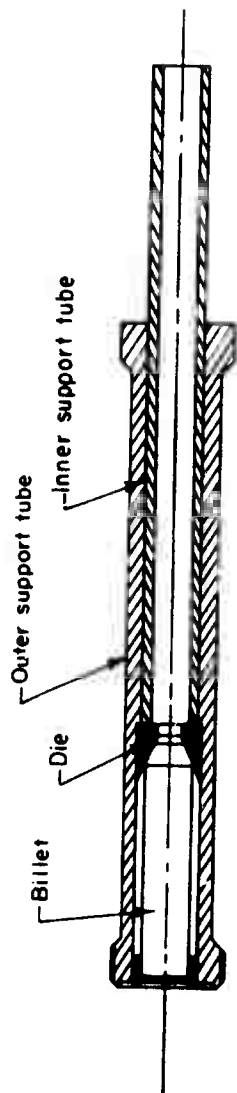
SUPPORT TUBE ASSEMBLY FOR LOADING BILLET INTO A 6-INCH CONTAINER
